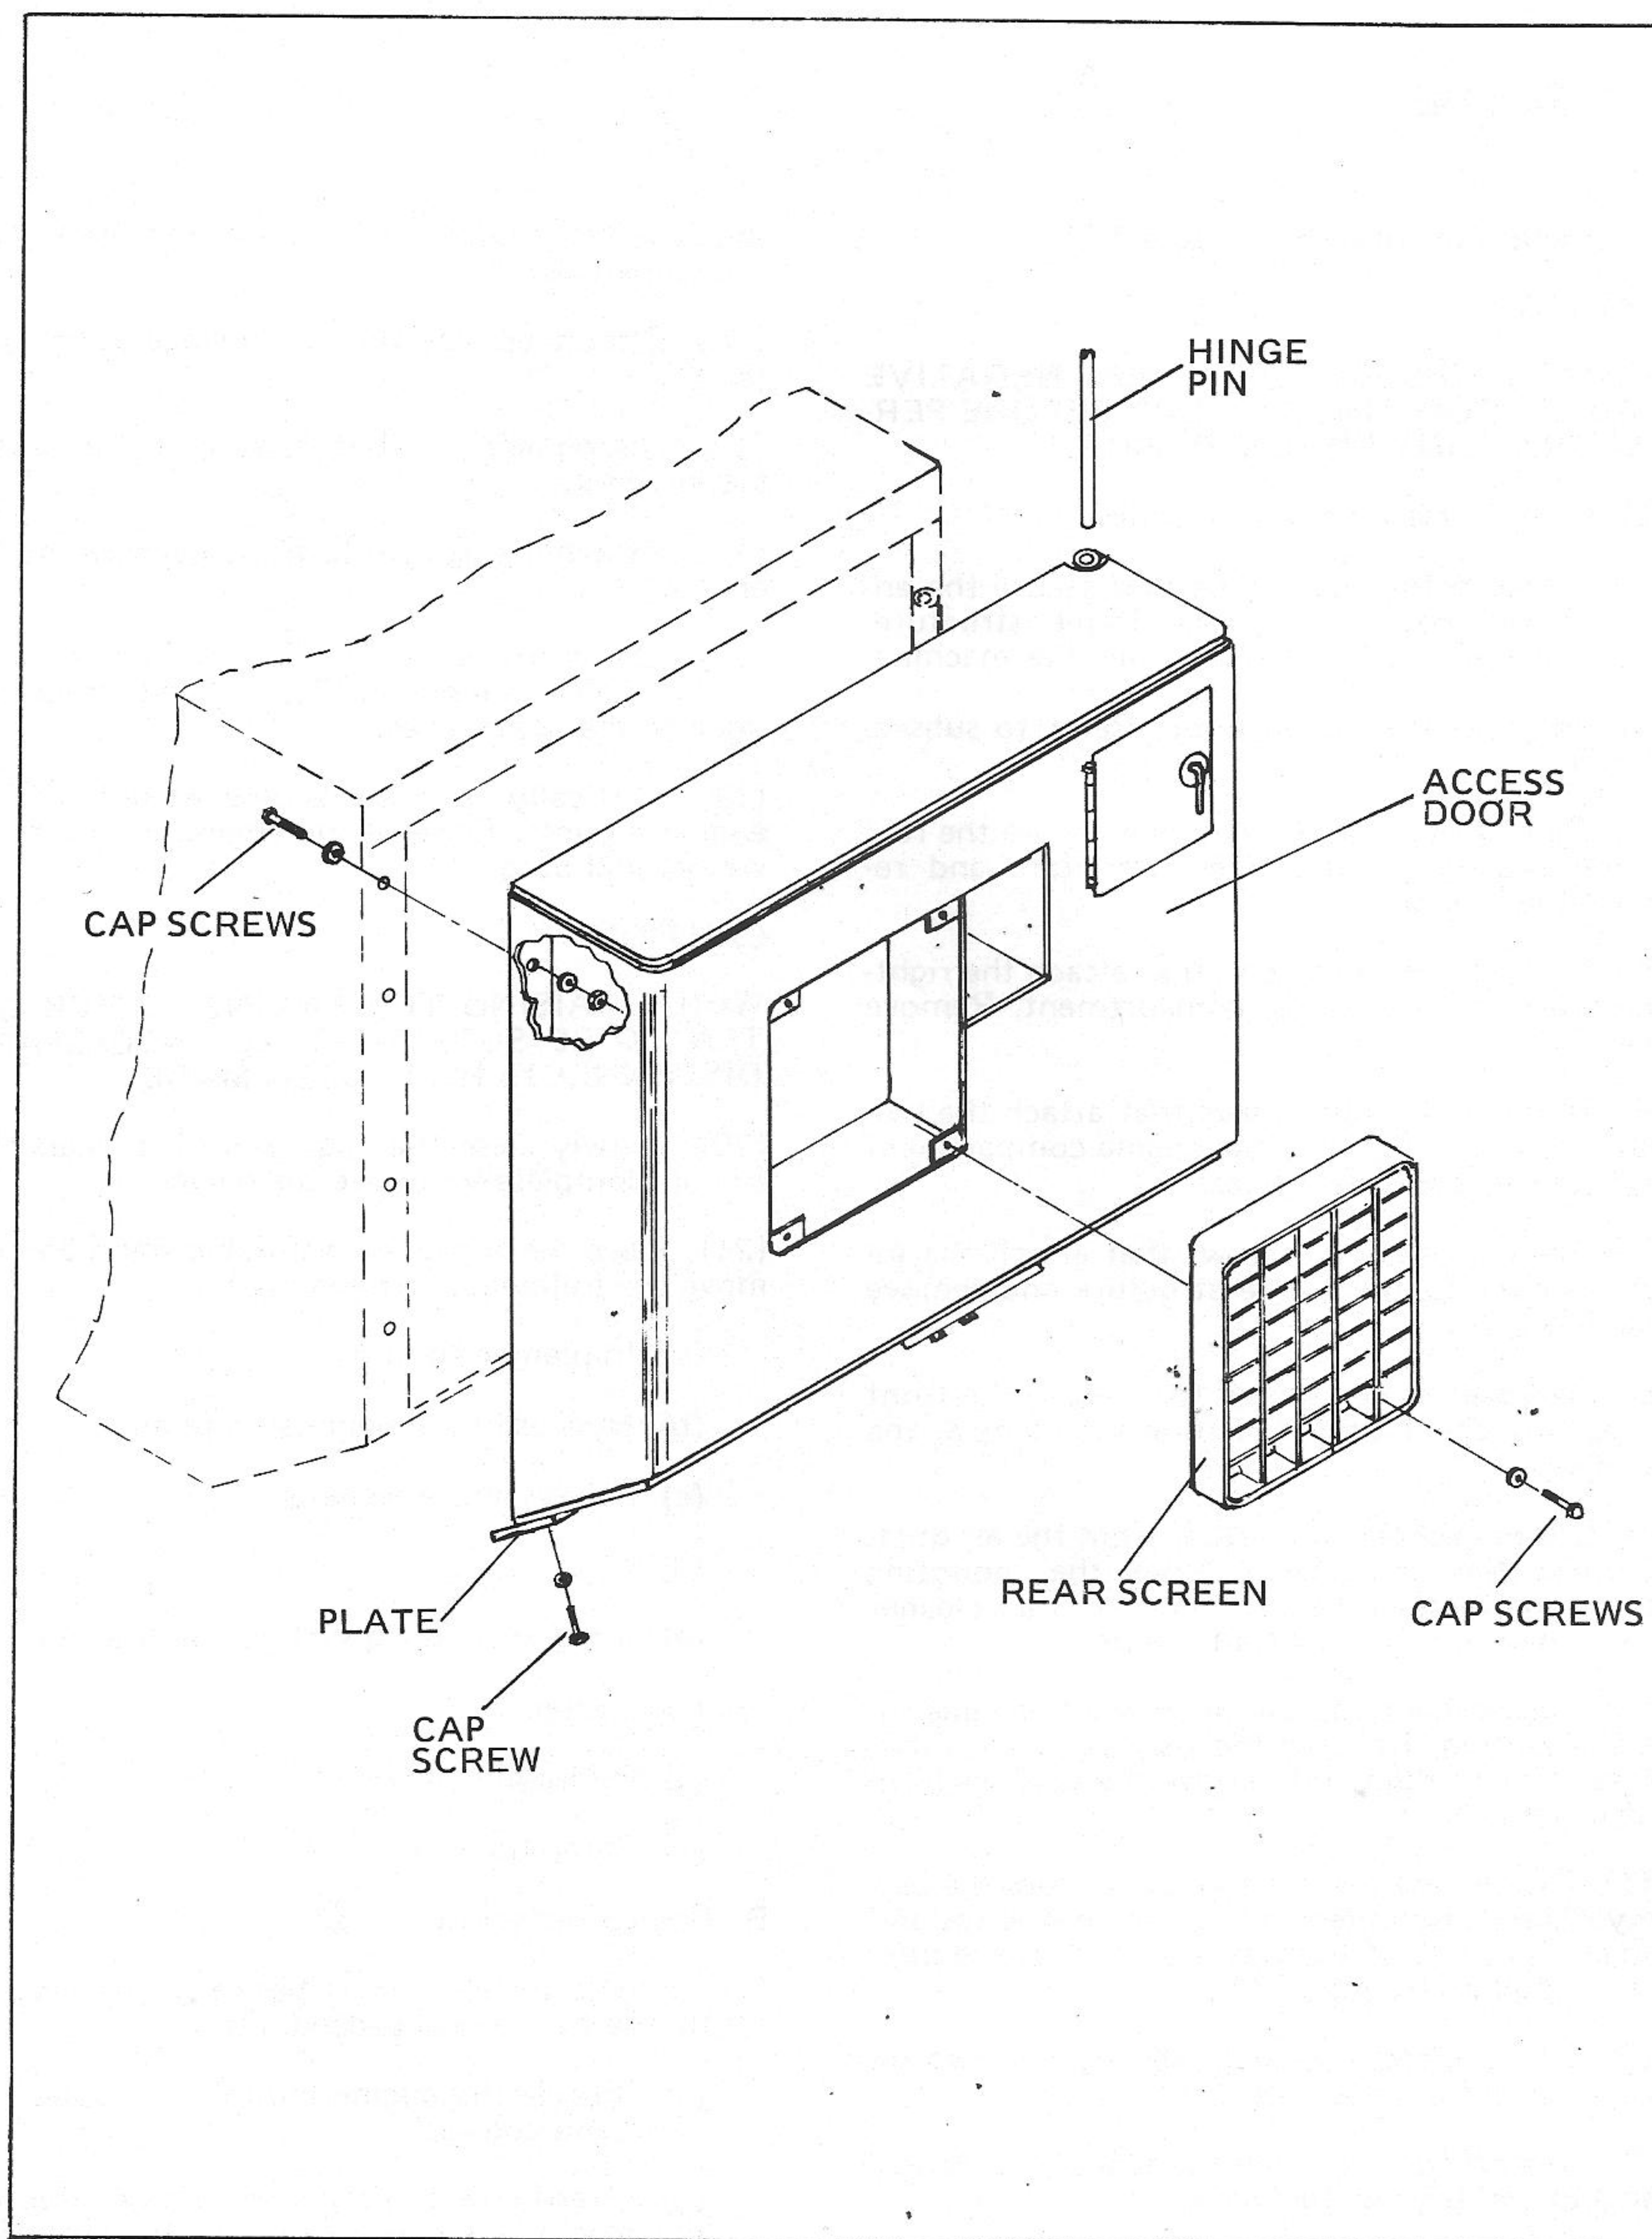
2. ACCESS DOOR INSTALLATION
